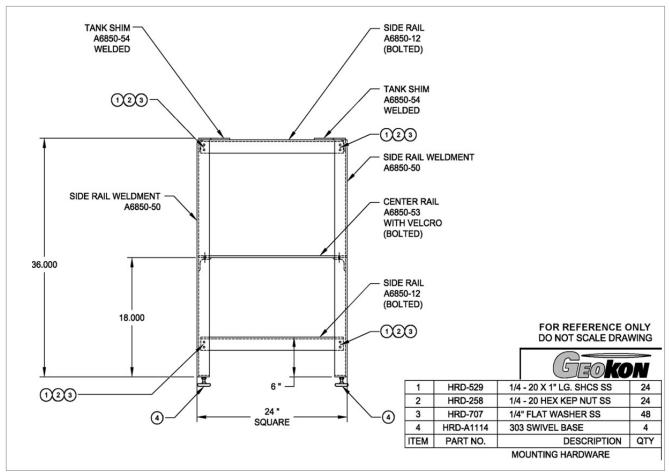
Inverted Pendulum Measurement Table Assembly Drawing
